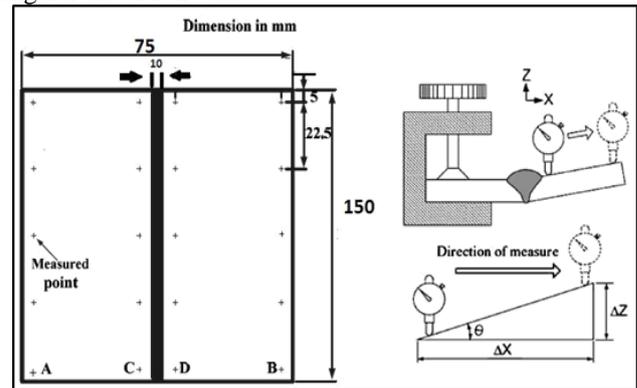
Schematic Diagram of Weld Distortion Measurement
